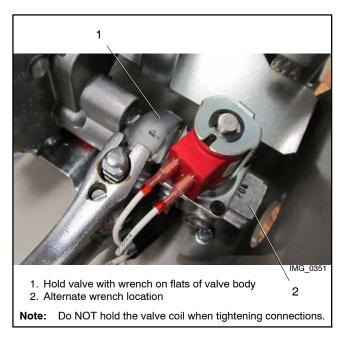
Holding Fuel Valve to Tighten Fuel Connections
